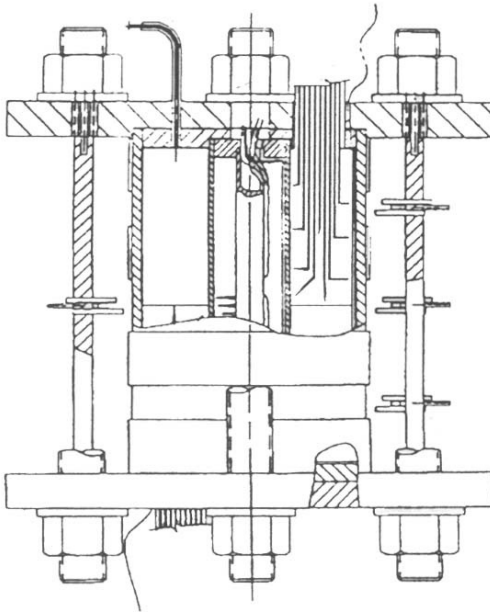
Hollow Thermal Explosion Experimental Configuration.
